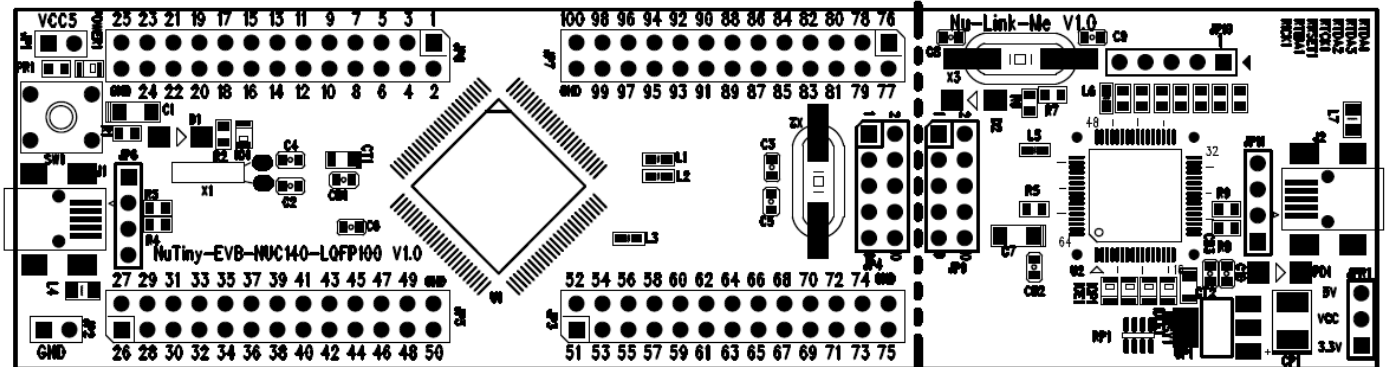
NuTiny-SDK-NUC140 PCB Placement
